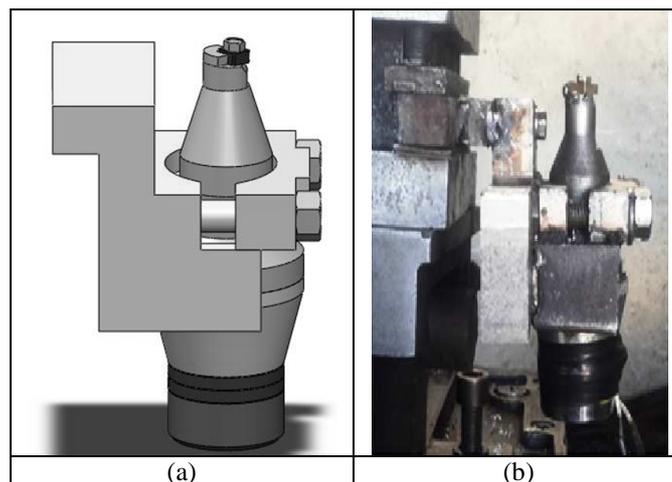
a) 3D model of the designed vibro-tool sets, installation modes of the fixture.
